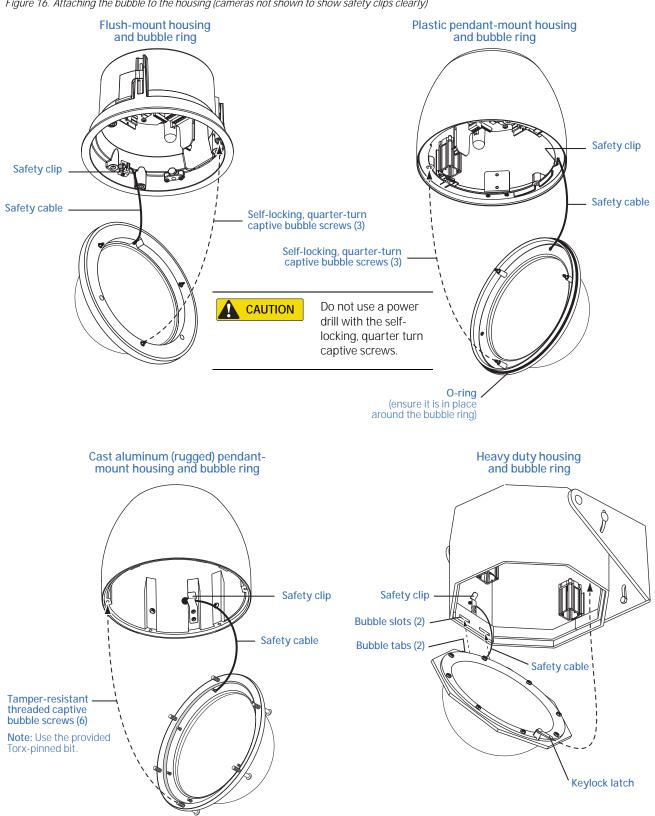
Attaching the bubble to the housing (cameras not shown to show safety clips clearly)
